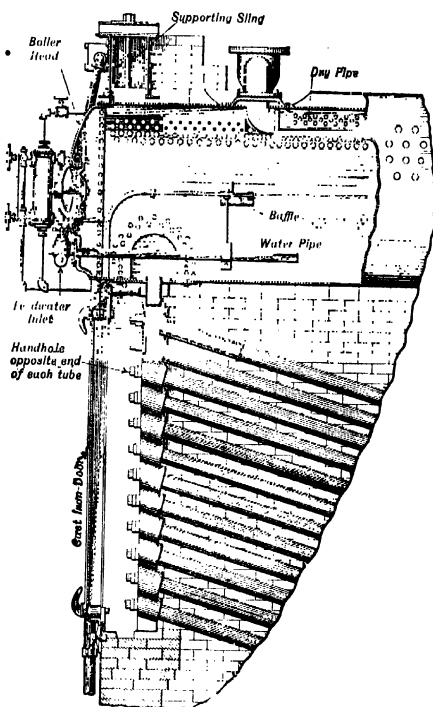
Section showing Construction of Front End of B. and W. Boiler.
